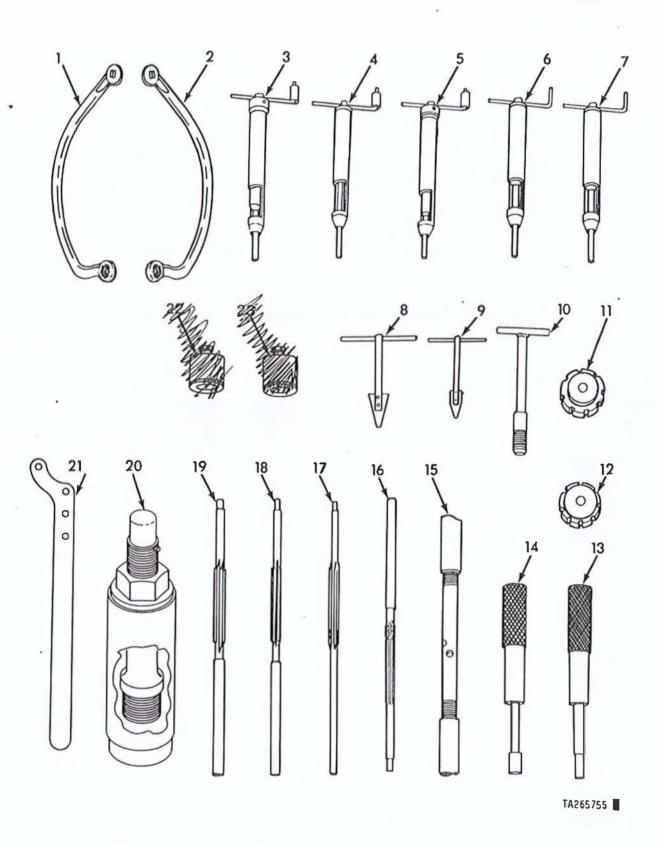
Special tools and equipment (sheet 1 of 2)
